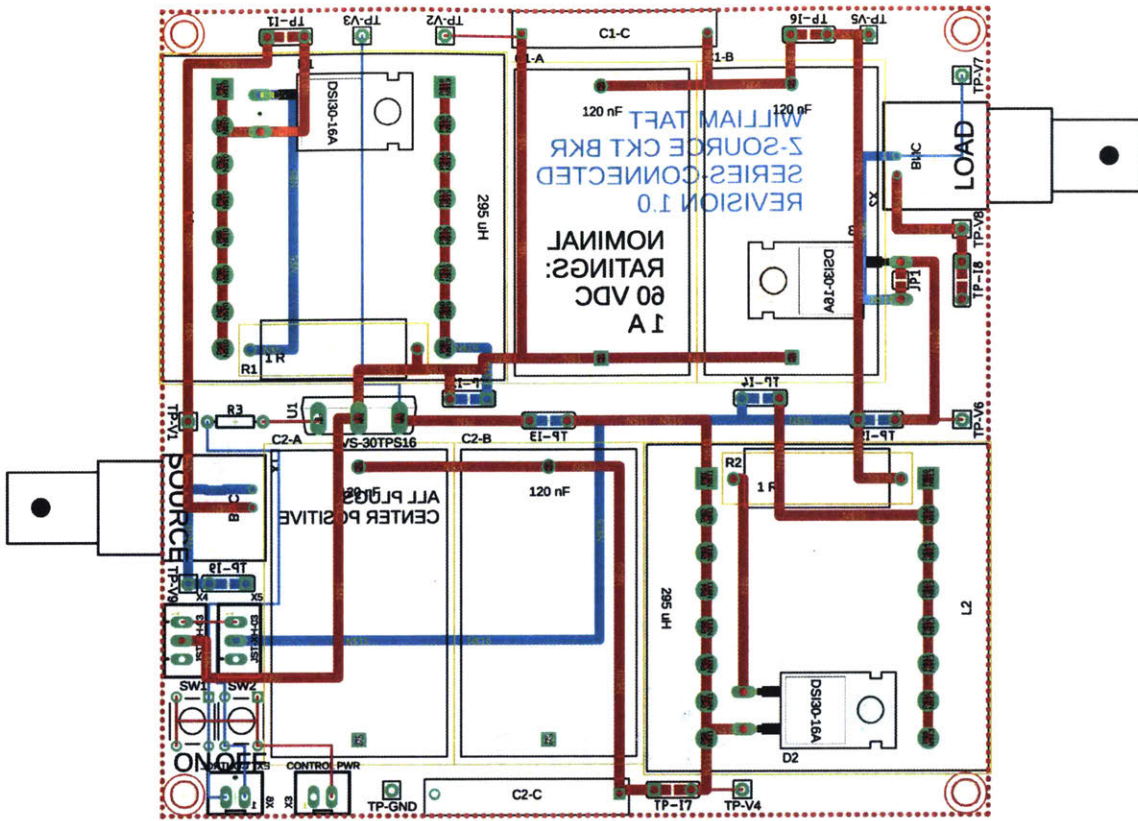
Z-source circuit breaker layout showing both top and bottom (with reverse printing) layers.
